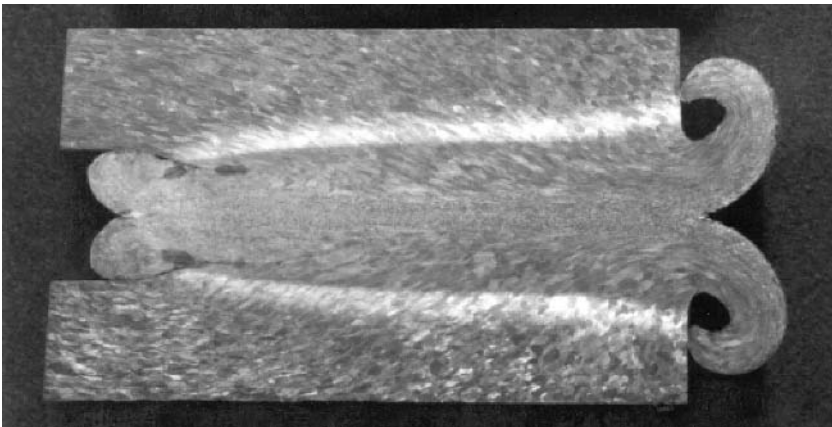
Photo of macro etched cross section of inertia weld, compare to Fig. 3.55 (courtesy GE Aircraft Engines)
